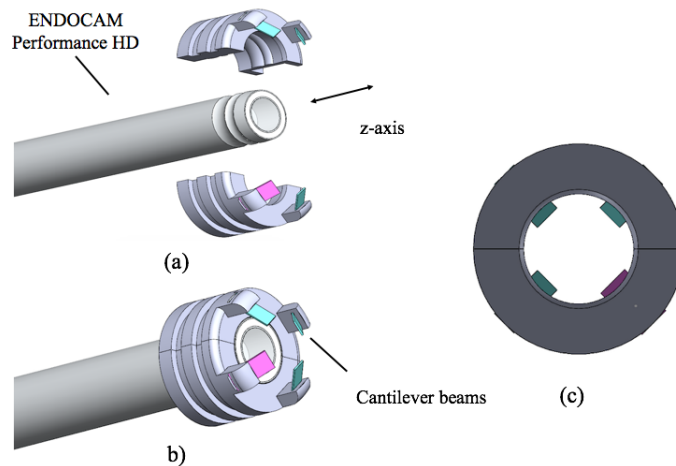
CAD Drawings: (a) Exploded view of the sensor, (b) sensor assembled at the tip of an endoscopic camera, (c) camera field of view.
